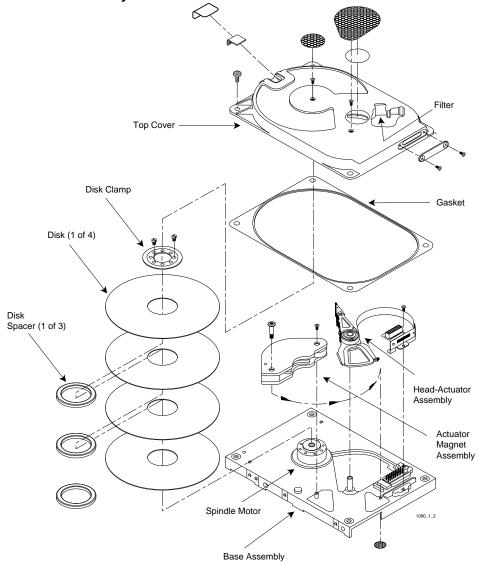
shows the details of the drive mechanism, which is called the headdisk assembly.
